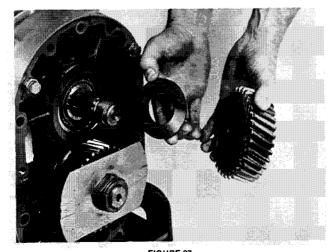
POSITIONING BELLEVILLE SPRING AND DRIVE GEAR BEFORE ASSEMBLING TO DRIVE ROTOR SHAFT
